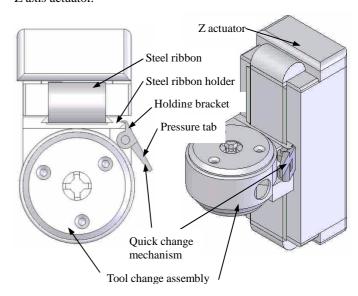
Tool Change Assembly Connected to Z Axis Actuator Through Quick Change Mechanism (top view and iso view)
